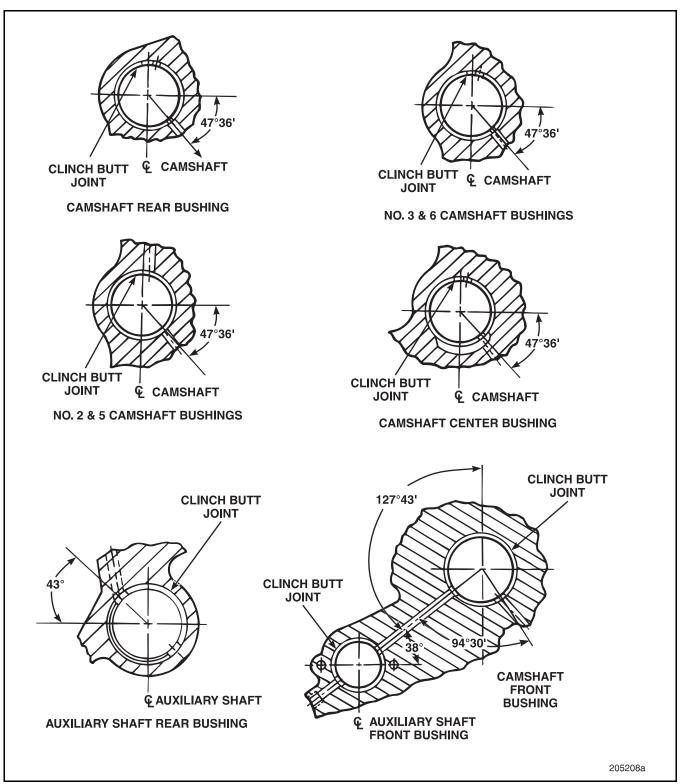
Camshaft and Auxiliary Shaft Bushing Alignment
